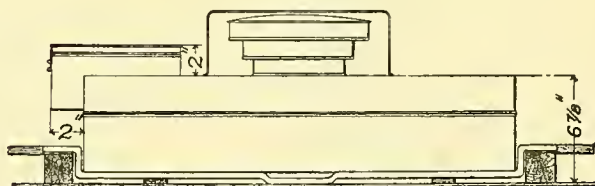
SIDE VIEW OF CARBURETOR IN MANTLE.
